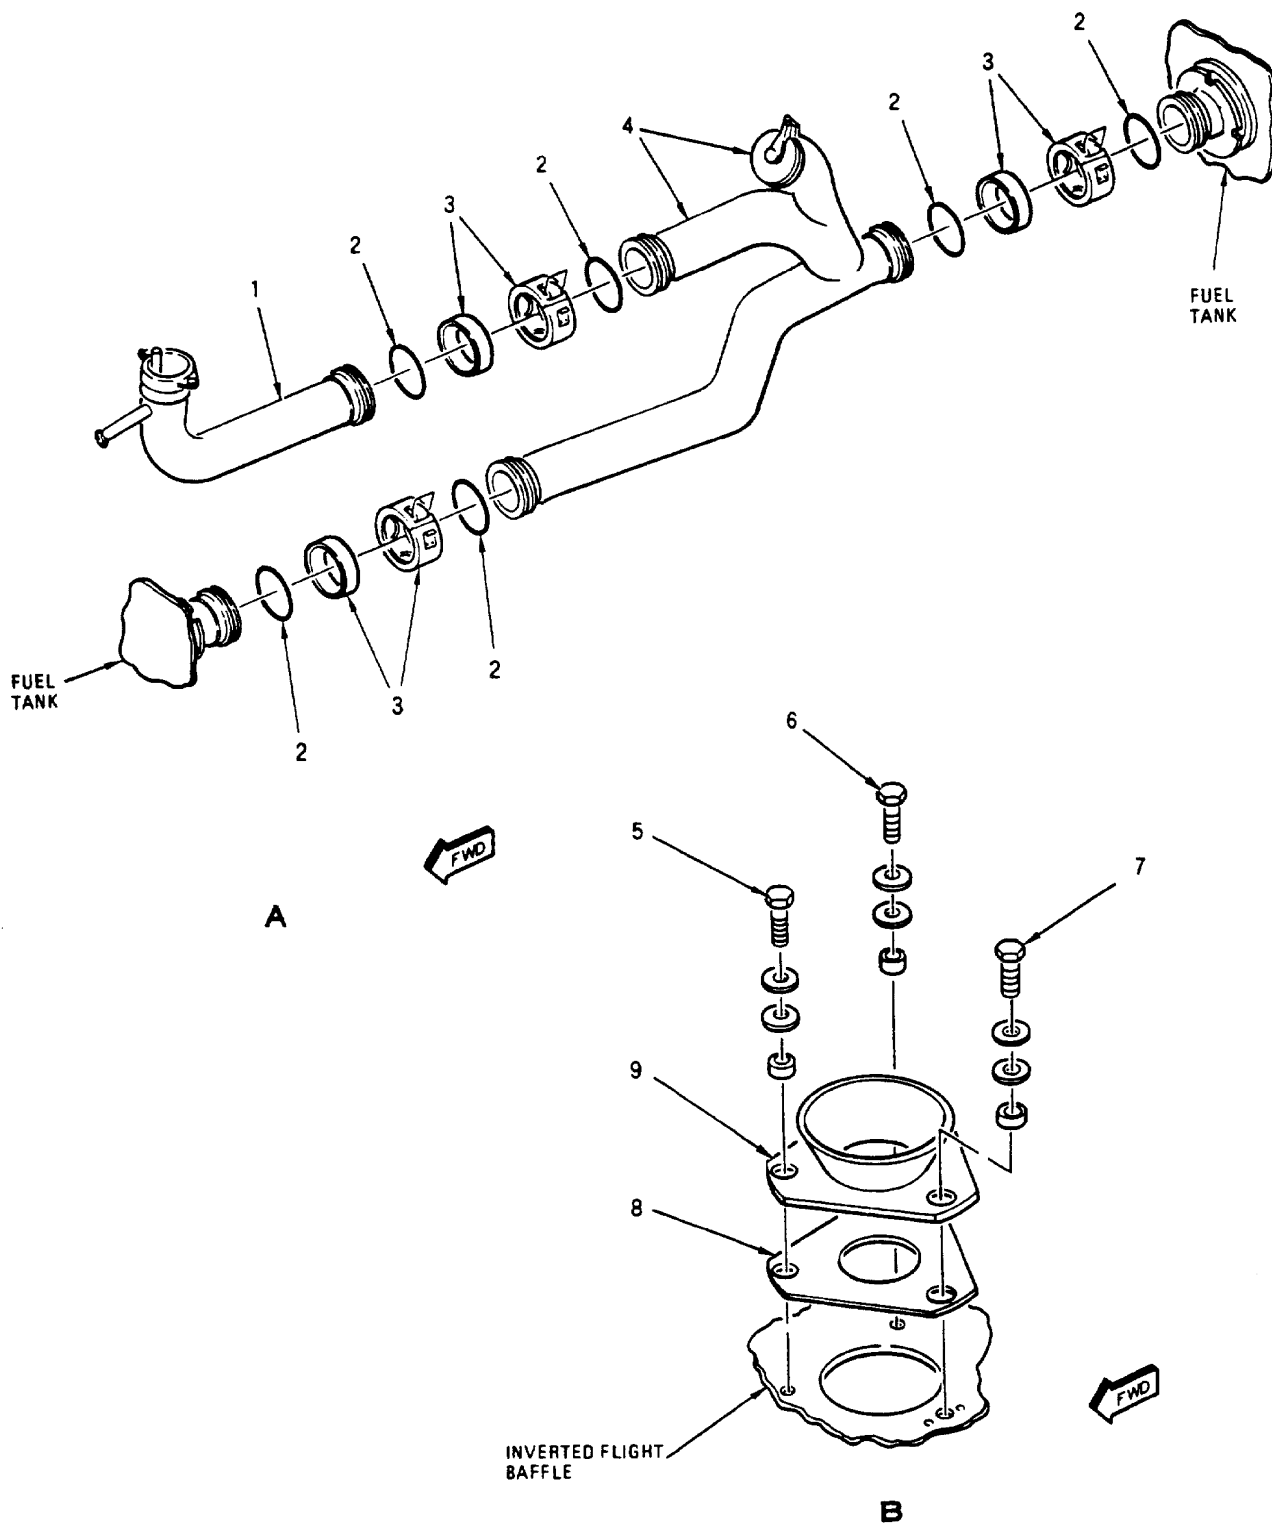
Defuel Valve (5VAP521) (Sheet 2)
